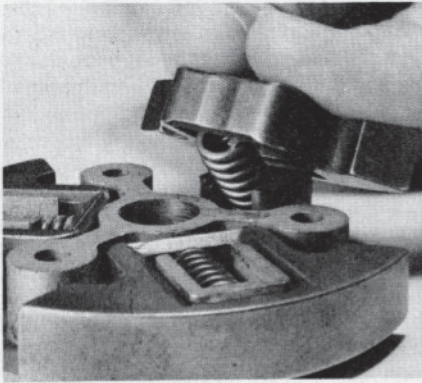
View showing easy method of installing clutch shoes and springs. Model EZ clutch is not shown; however, method is same.
